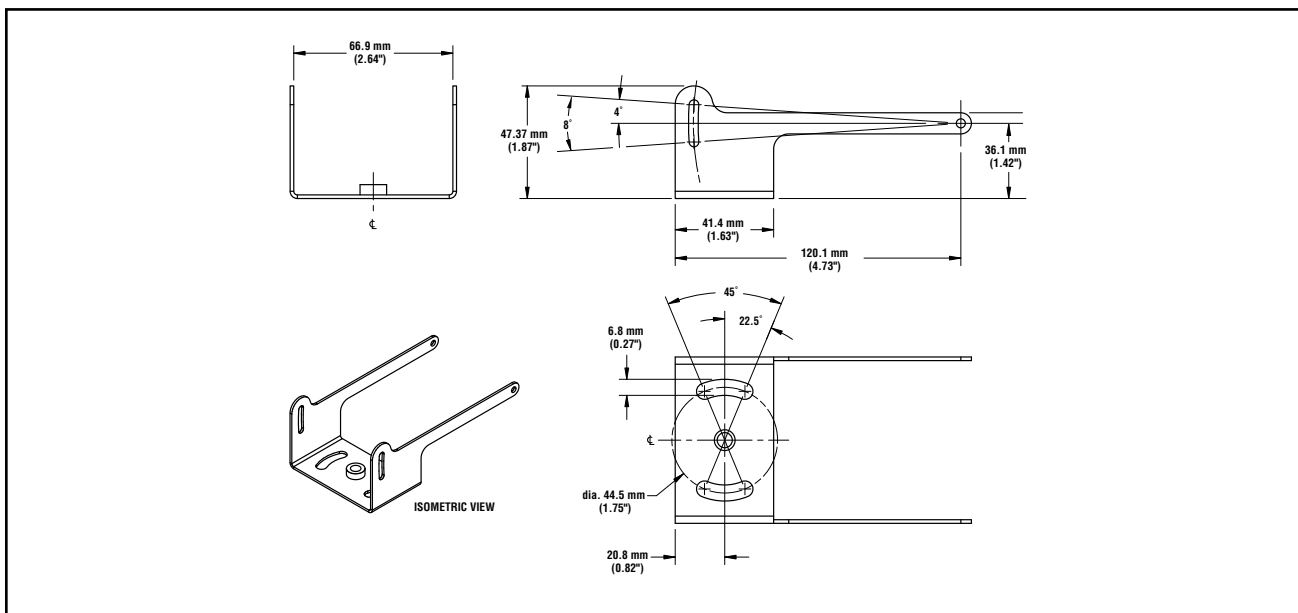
Right-Angle Sensor mounting bracket dimensions
